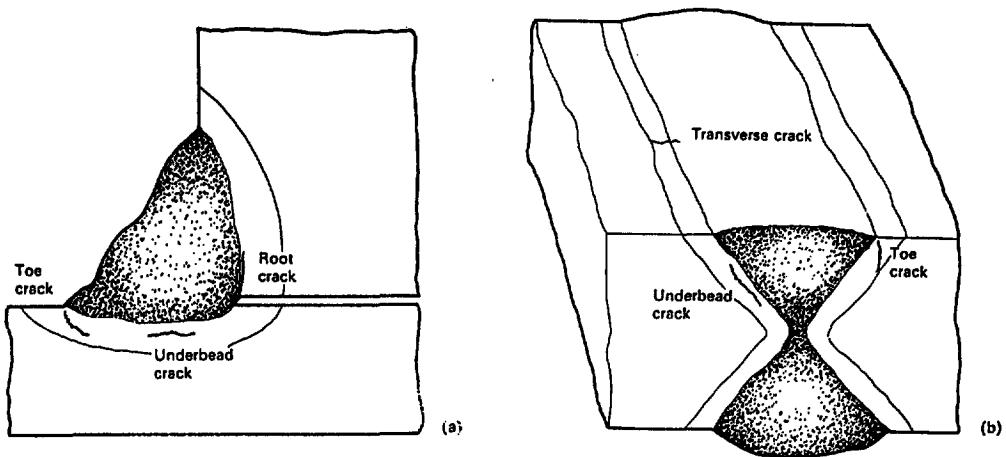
Hydrogen-induced cracks in HAZs of (a) a fillet weld and (b) a butt weld [1.11].
